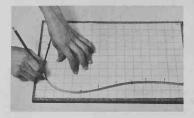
Making a quarter pattern using a thin wood strip.
